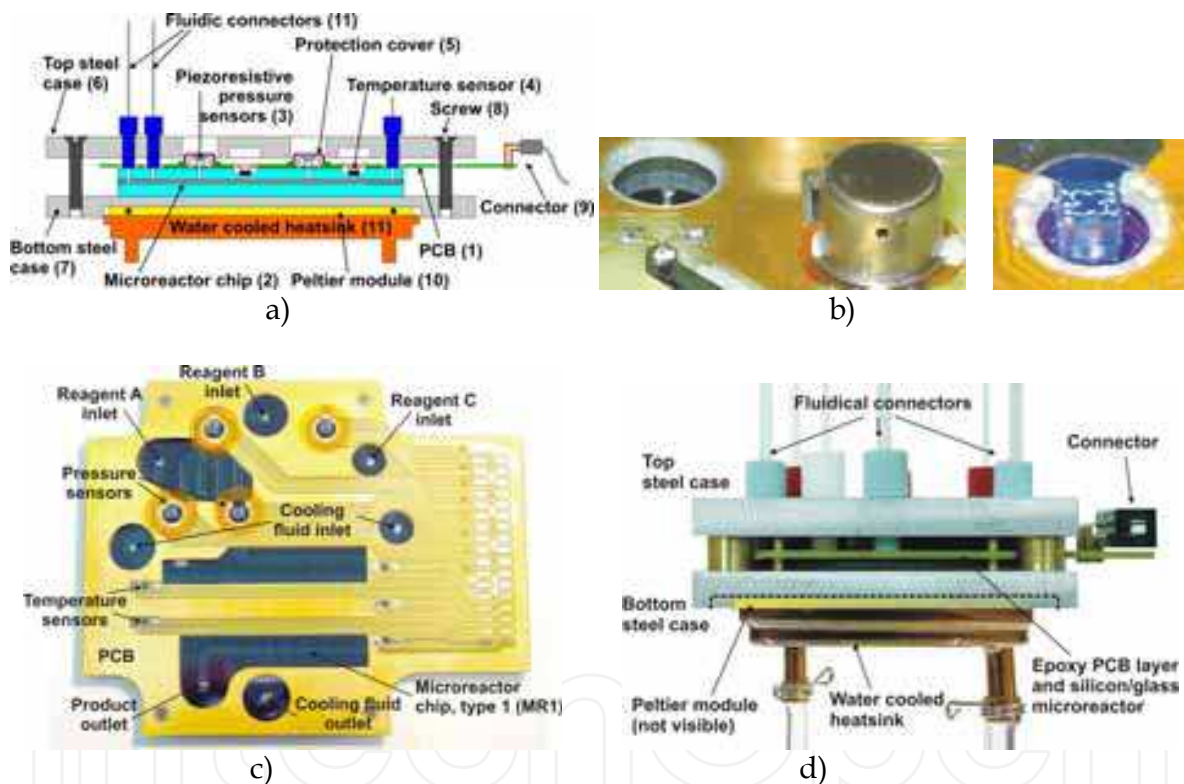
The microreactor in a package: a) cross-section view, b) details of sensors assembling, c) microreactor chip with PCB board, d) a side view
